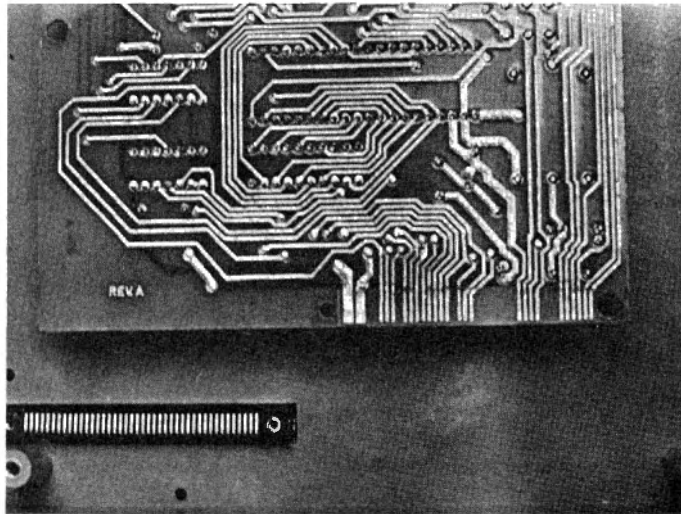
RS-232 Board and 42 pin connector. Note: the circuit board is pictured upside down with the foil contacts in reverse order.
